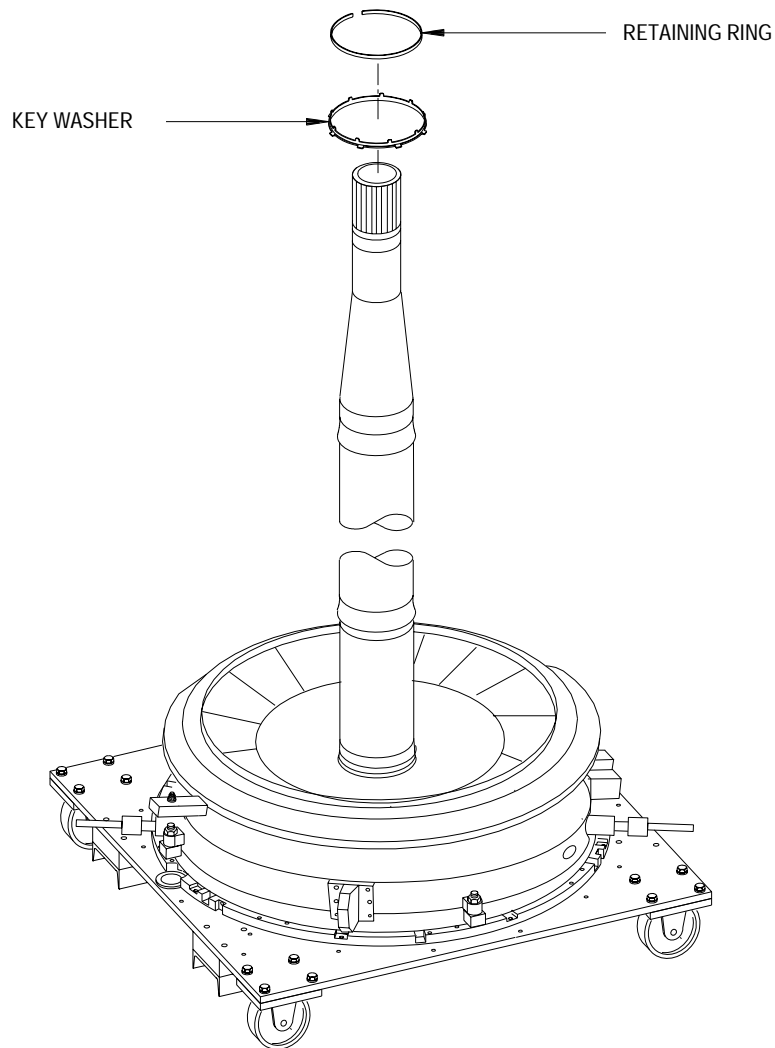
Front Compressor Drive Turbine Shaft Nut - Installation and Torque Procedure (Sheet 2 of 3)
